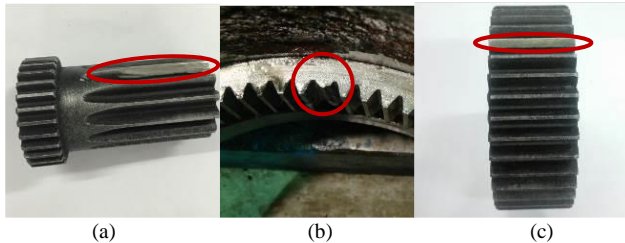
Localized gear faults on: (a) sun gear, (b) planet gear, and (c) ring gear.
